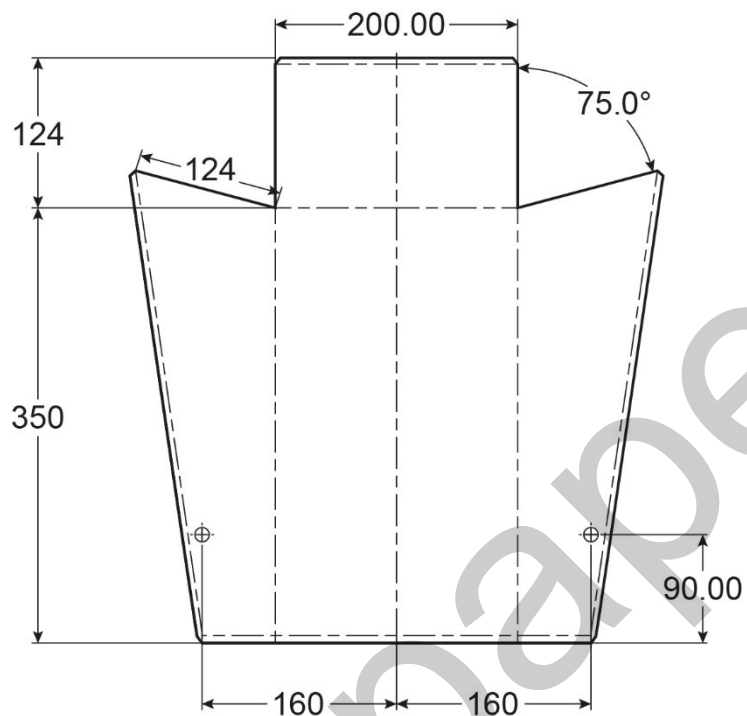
Drawing of dump body and chassis prior to folding (provided to support in the construction of the dump body and chassis).
